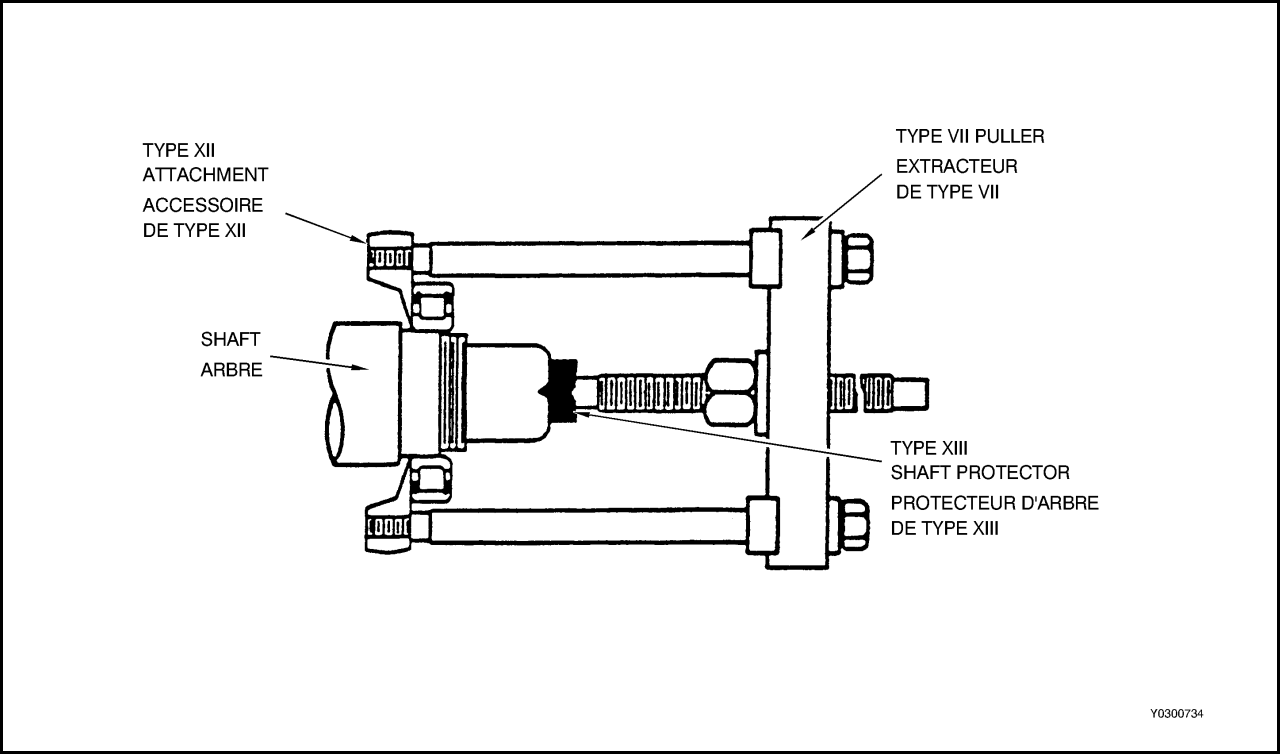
Bearing Puller Removal Using Split Puller Attachment and Shaft Protector
